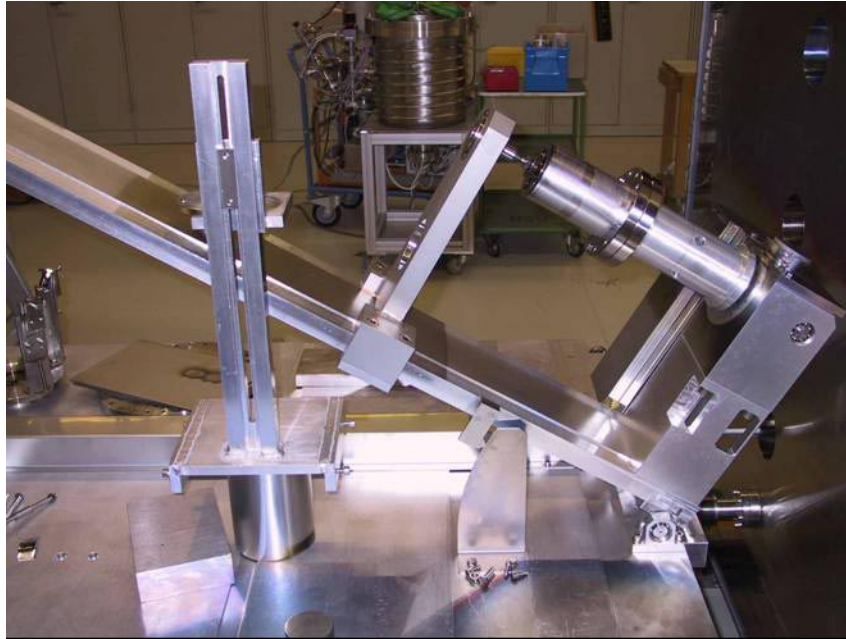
Welding fixture for flange-tube connections
